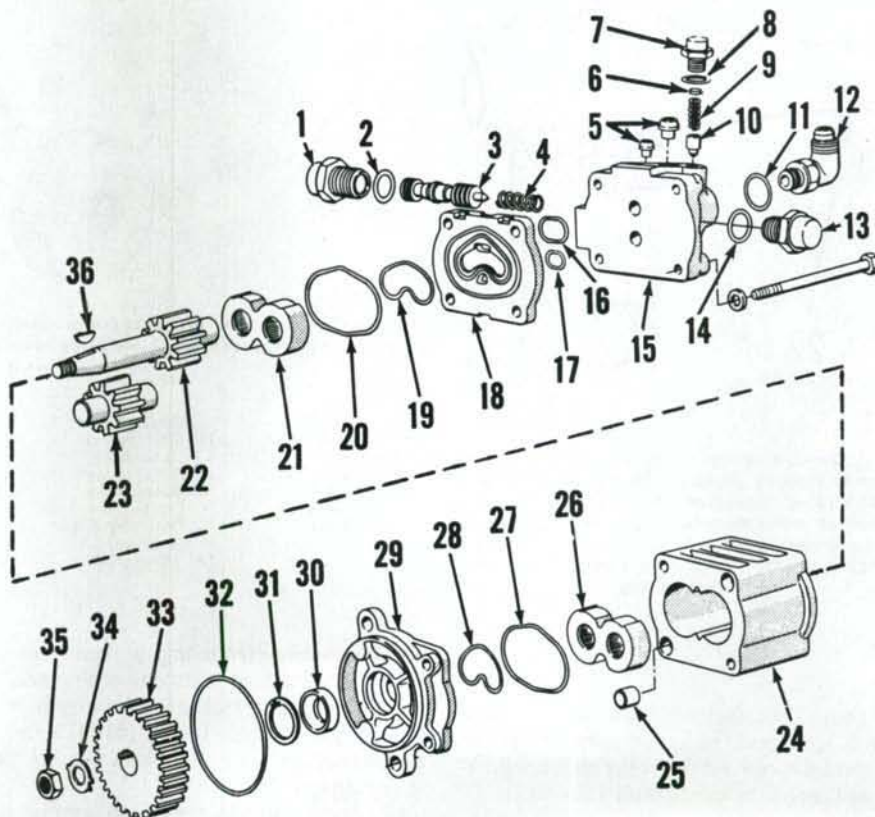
Exploded view of early power steering pump. Note that flow control valve spring (4) and small tip end of valve (3) is towards side of rear cover (15) containing relief valve assembly (Items 6 through 10).
